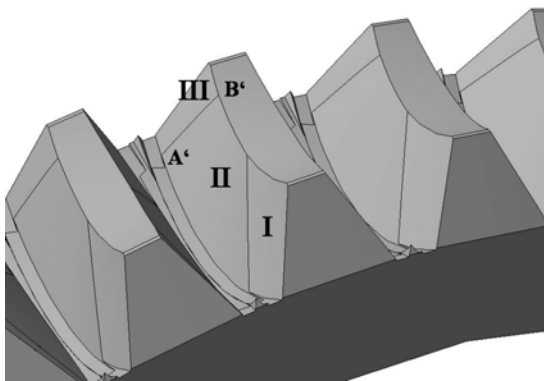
Globoid gear wheel tooth cut by 4-cutter fly-blade
